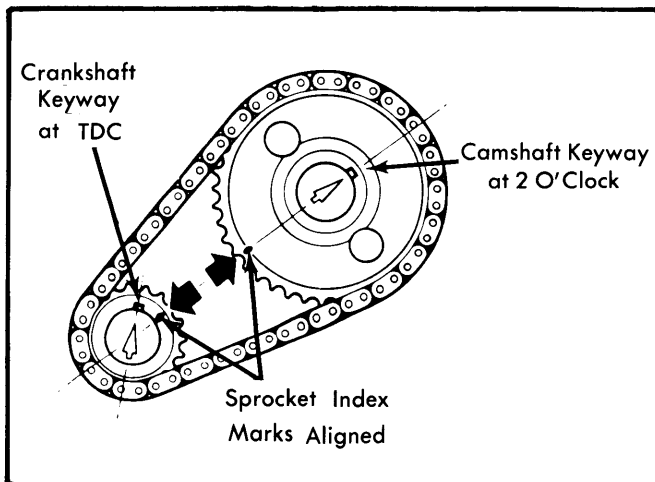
Camshaft and Crankshaft Sprocket Alignment
